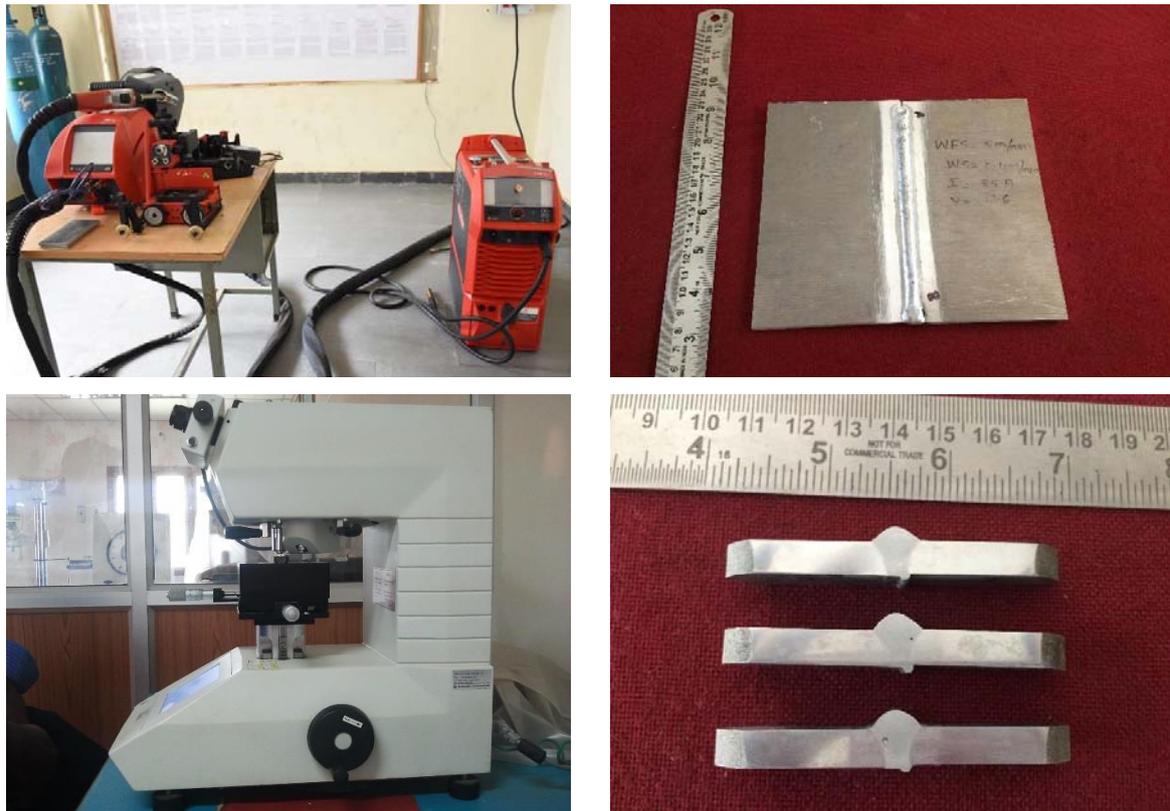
The Experimental work (a) CMT welding machine, (b) CMT joints, (c) Vicker's microhardness testing machine, (d) Microhardness specimen
